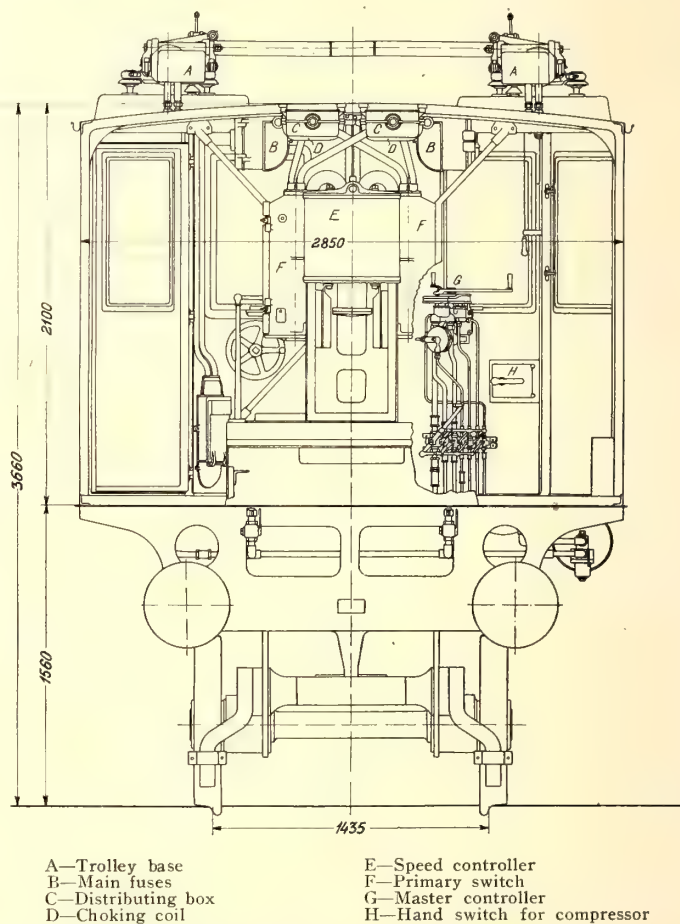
FRONT VIEW OF LOCOMOTIVE
